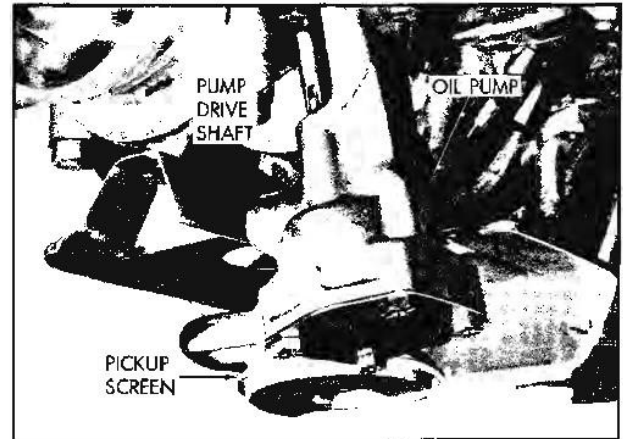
Oil Pump and Oil Pump Drive Shaft
